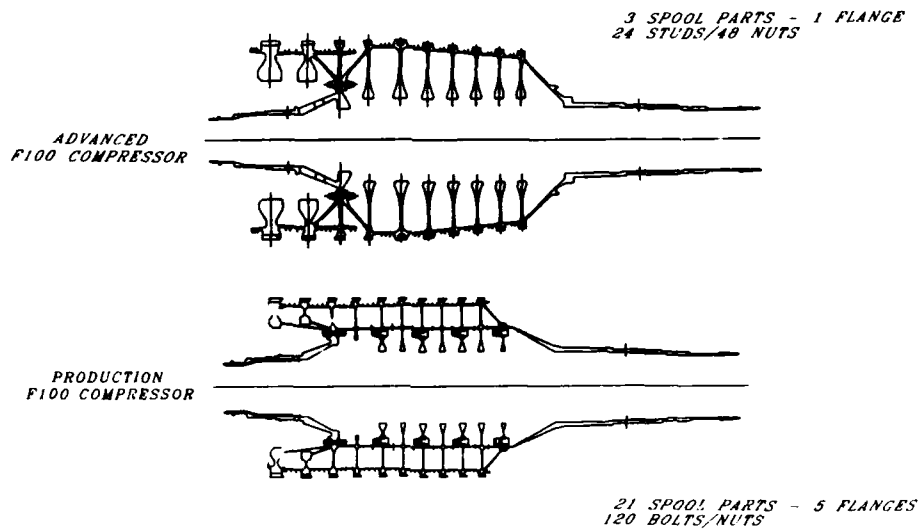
ADVANCED F100 COMPRESSOR - FEWER PARTS
